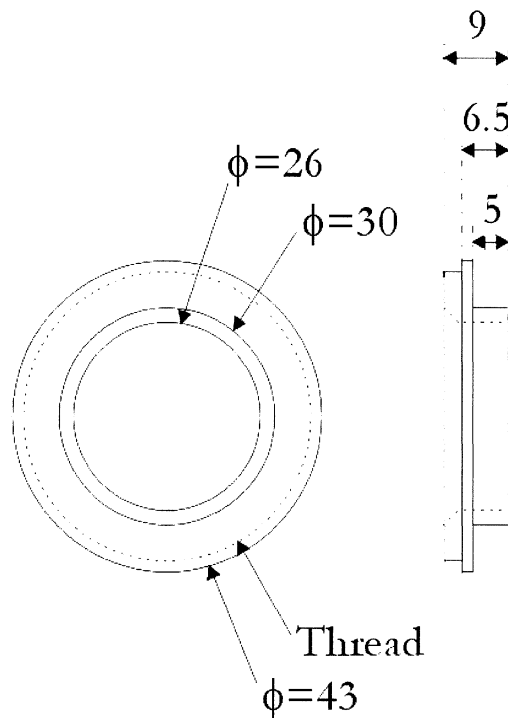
The mounting ring for the camera lens has a thread that fits the filter thread of the camera lens.
